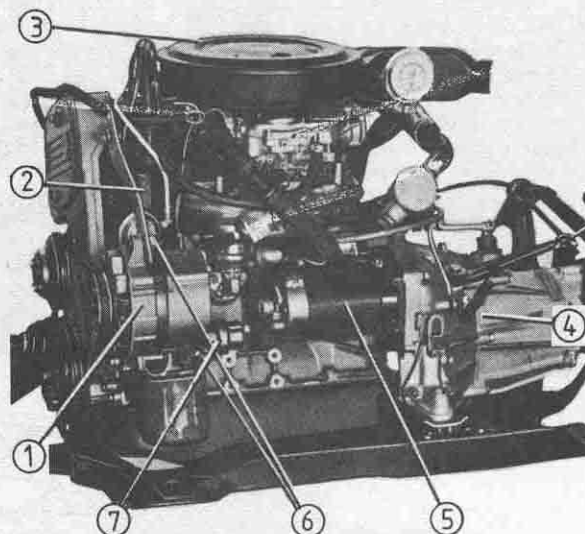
View of starter motor and alternator locations with engine out of the car (Secs 13 and 7)
